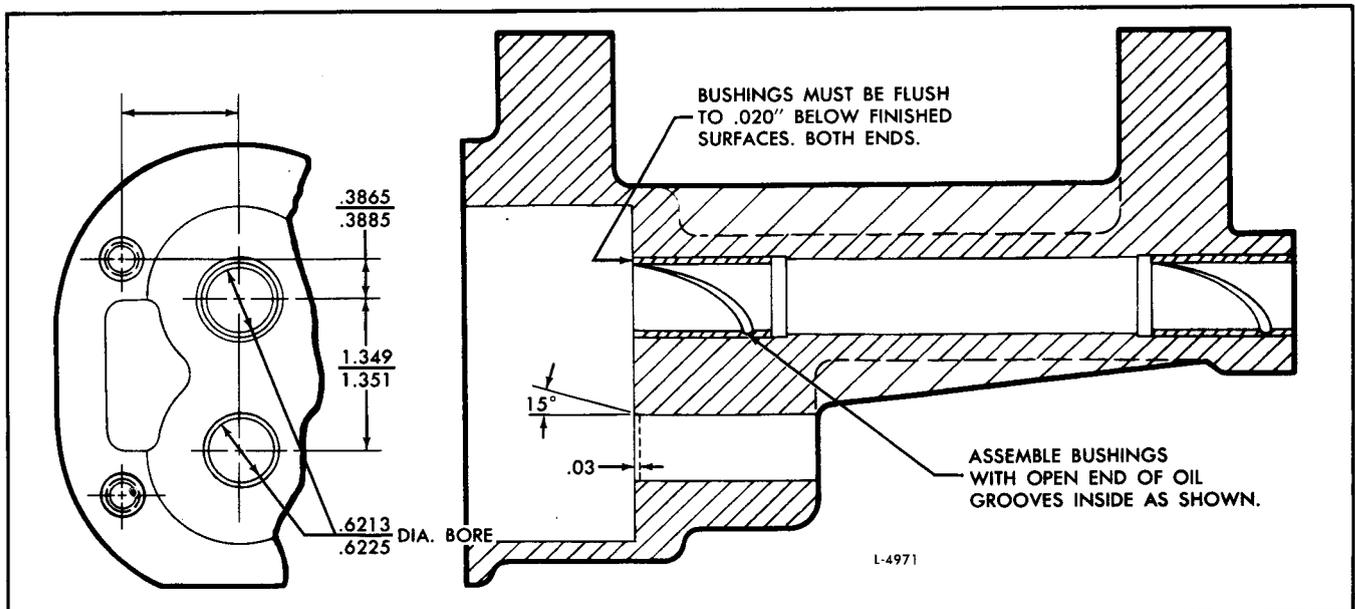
Diameter and Location of Bushings in Oil Pump Body
